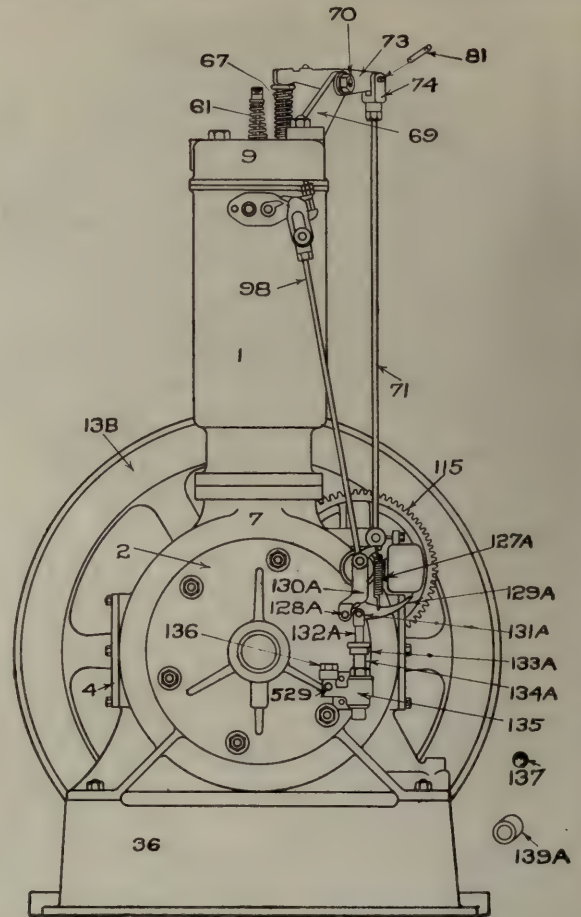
Sectional View—Fairbanks, Morse Vertical Gas and Gasoline Engine.
